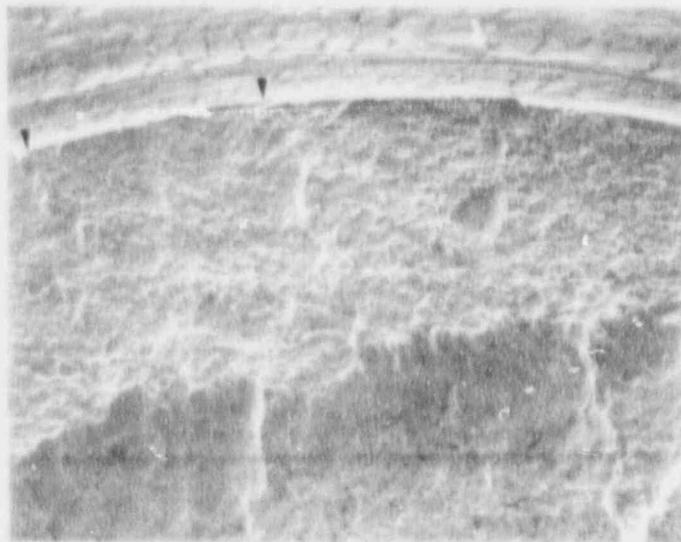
A SEM fractograph of cracked bolt number 2, illustrating details of the fracture surface of the crack, with the arrows illustrating hackle marks, at 60 X magnification.
